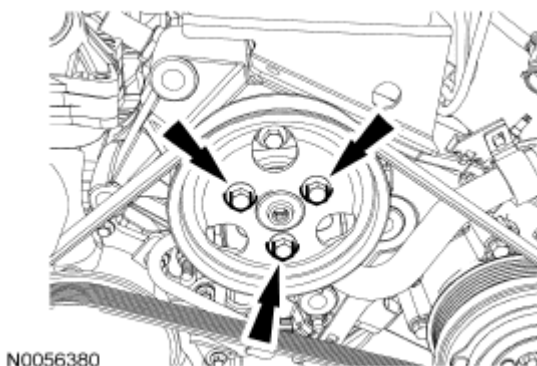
Identifying Power Steering Pump Pulley Bolts
